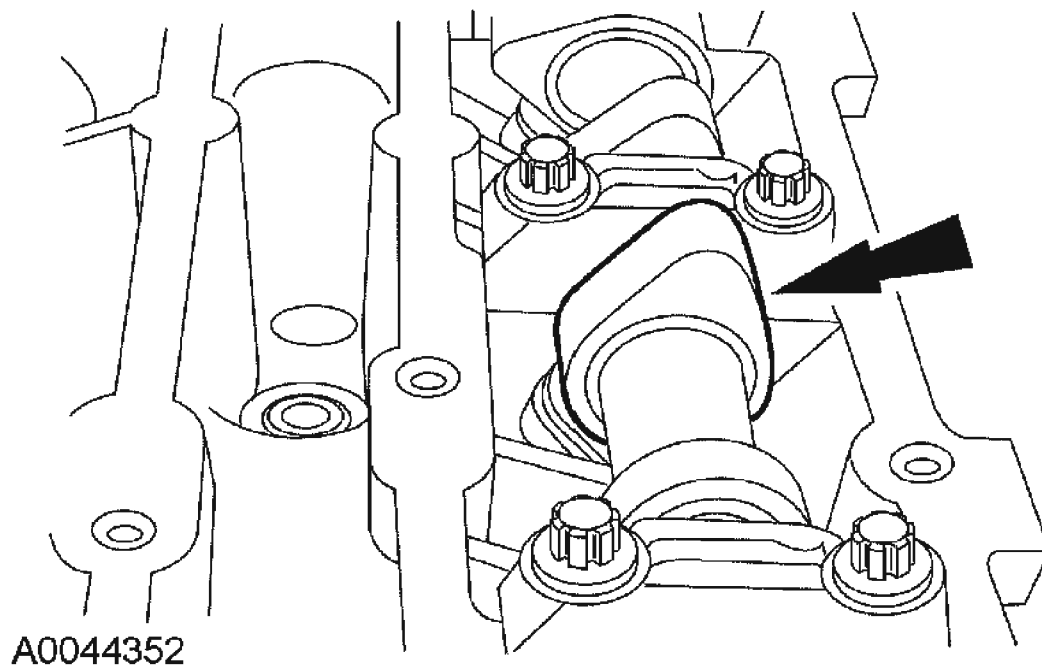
Marking Position Of Camshaft Lobes On No. 1 Cylinder For Assembly Reference
